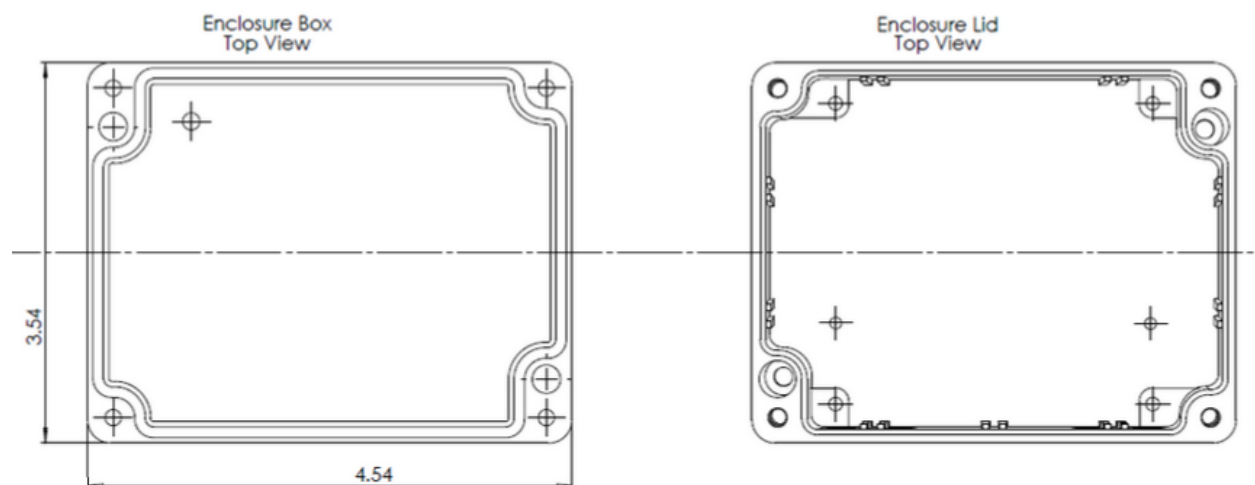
Top View of Enclosure Box and Lid Draft and Dimensions
